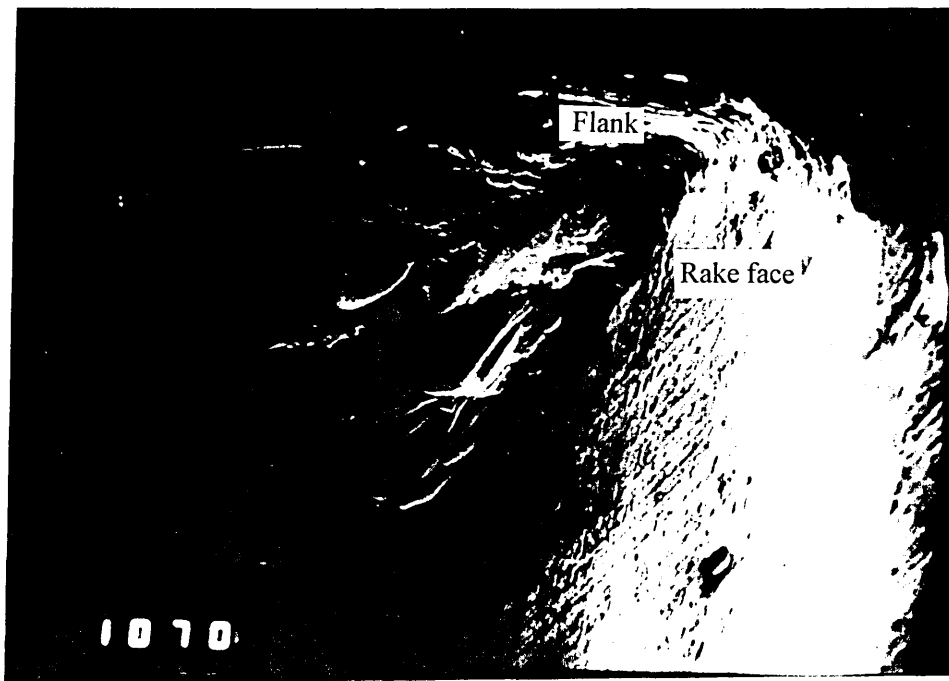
(b) The large edge chipping occurred on the roughing tooth of segment B1
